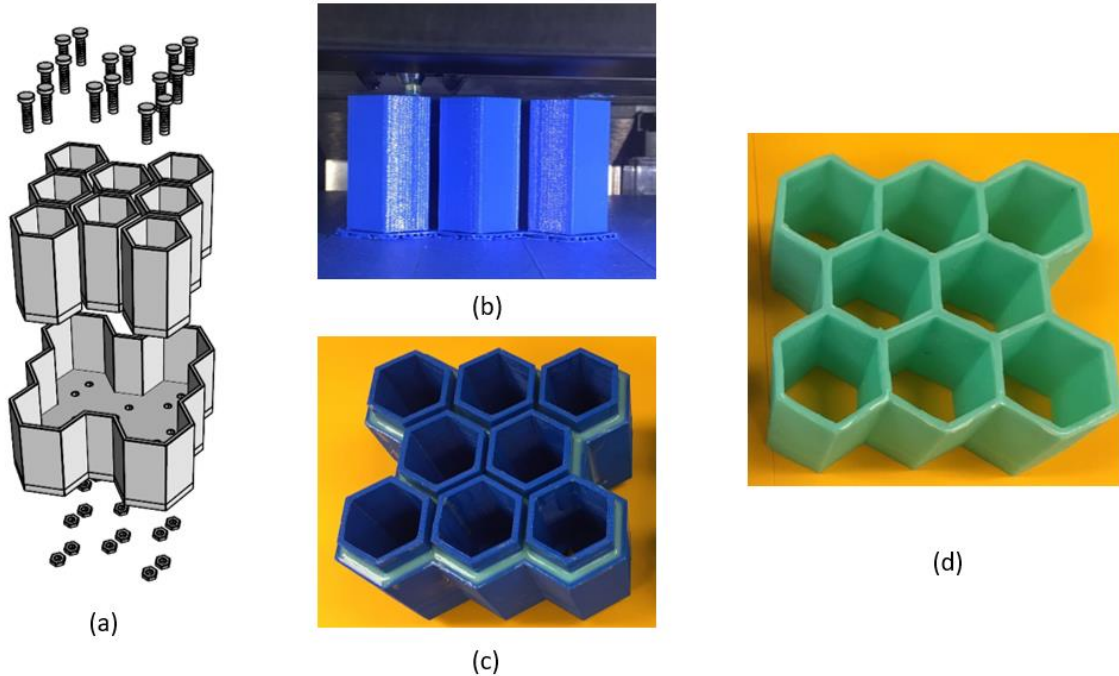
Specimen casting process: (a) the designed CAD model of mold, (b) mold printing with Makerbot z18, (c) pouring silicone with syringe into the mold, (d) demold the cast after curing for 4 hours.
